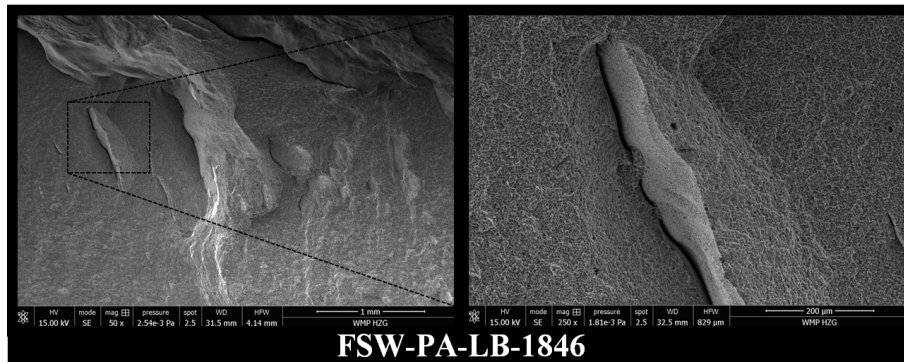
SEM micrographs of fractured surface of the FSW-PA-LB-1846 weld.
